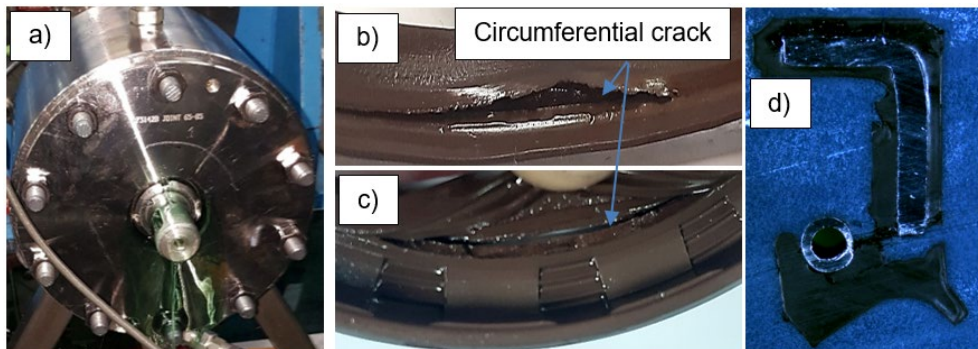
Radial shaft seal failure, a) Oil flow leakage, b) Crack on airside, c) Crack on oil side, d) Crack through the profile
